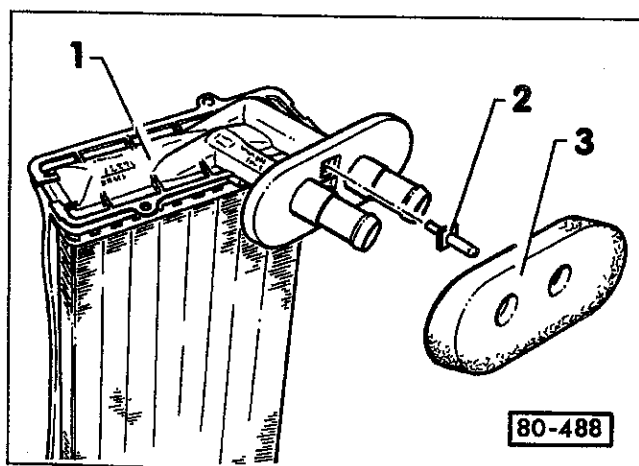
Install vacuum hose adapter (2) and replace gasket (3) when installing new heater core (1) on cars with A/C.
